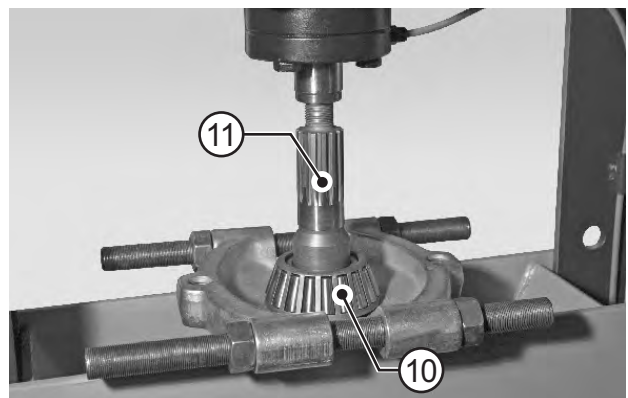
Using a puller and a press, remove the inner bearing cone (10) from the pinion (11).
